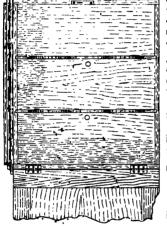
Front Elevation of Left-hand Pedestal of Desk, with Door open.
